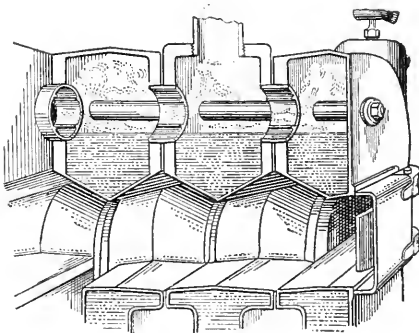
CONNECTIONS OF THE HOLLOW CASTINGS IN IDEAL SECTIONAL BOILERS BY MACHINE-TURNED PUSH NIPPLES.
